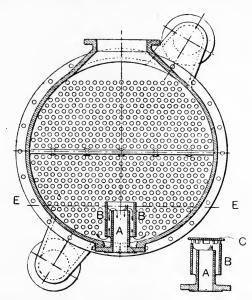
CROSS SECTION OF HORIZONTAL CONDENSER SHOWING WATER OUTLET.
